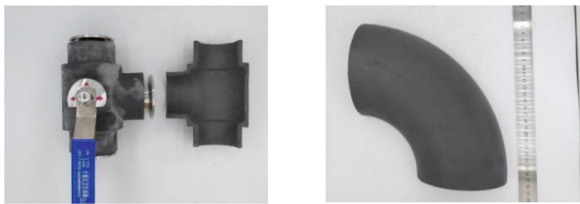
3D Printing Nylon-Tungsten Composite Shielding Material
